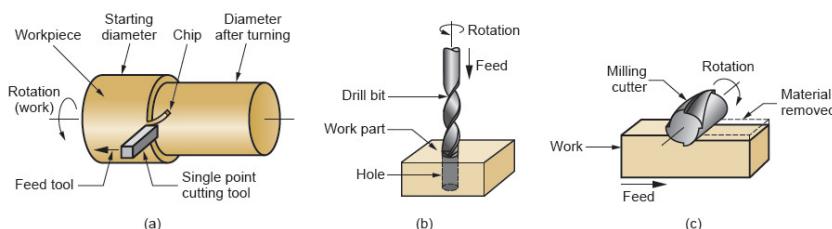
Common machining operations: (a) turning, in which a single-point cutting tool removes metal from a rotating workpiece to reduce its diameter; (b) drilling, in which a rotating drill bit is fed into the work to create a round hole; and (c) milling, in which a work part is fed past a rotating cutter with multiple edges.
